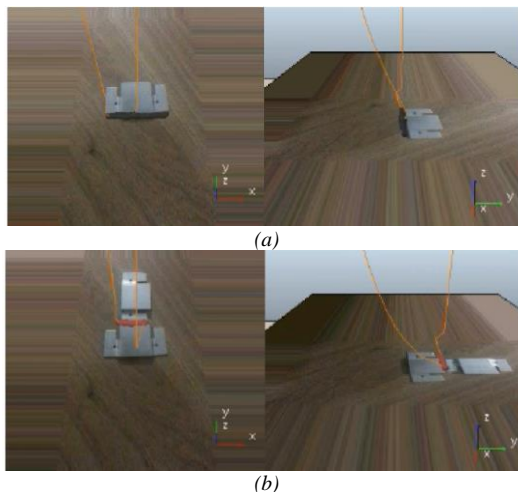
Processed metal object; (a) Sealing process, (b) Welding process
